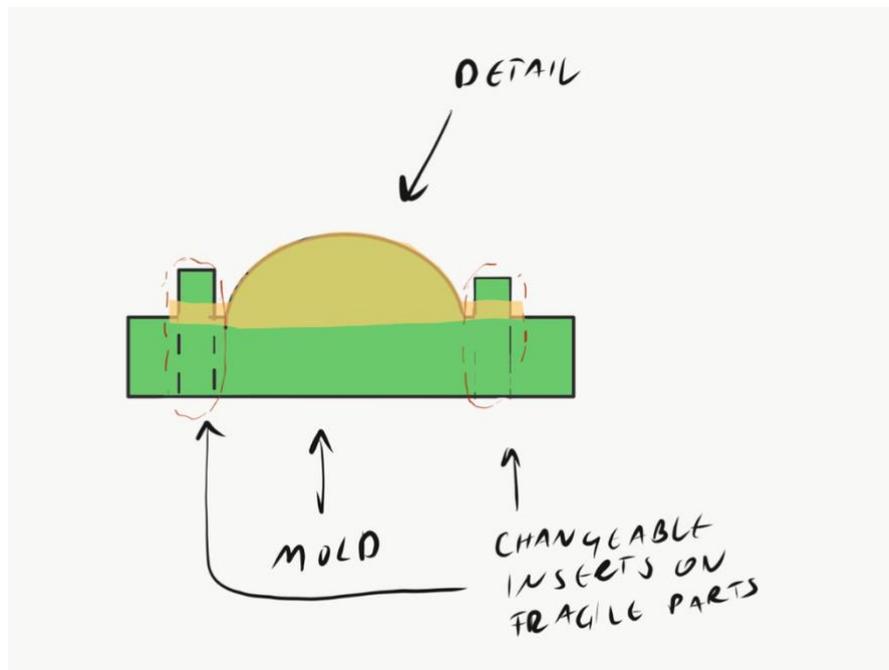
Concept 6: *Changeable Inserts* can be used on weak parts that have a tendency to break during injection molding.
